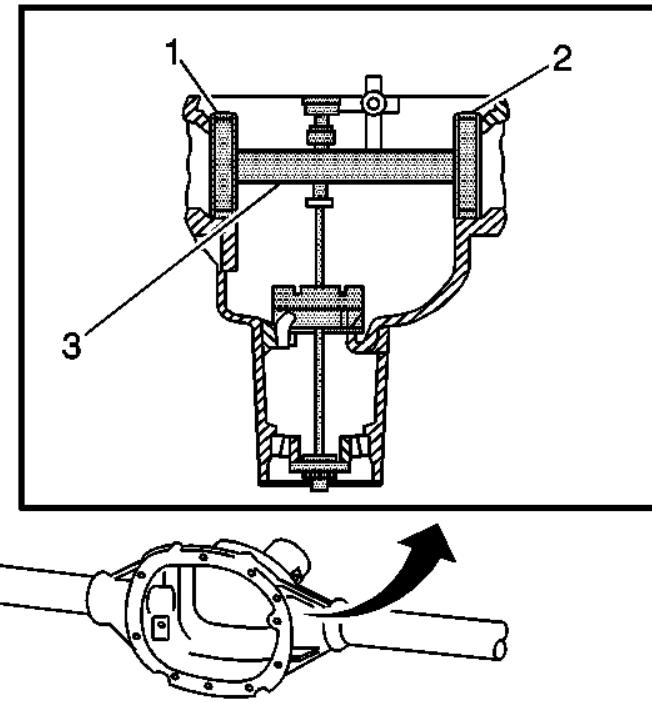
Assembling Special Tools In Differential Carrier Bore
